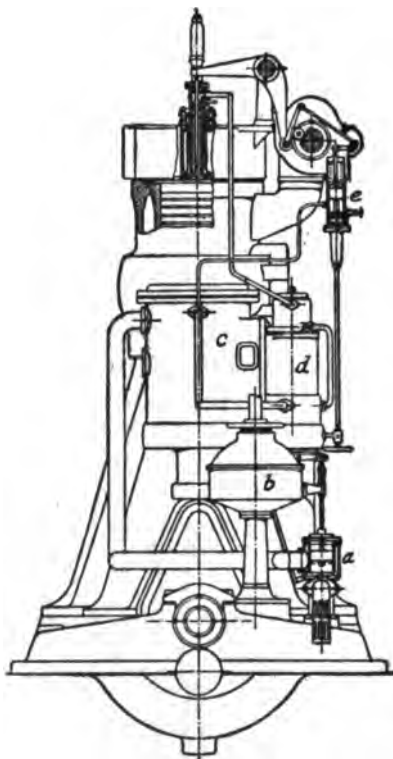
Patented throttling devices for Diesel engines. *a*, throttling valve; *b*, engine governor; *c*, scavenging pump; *d*, compressor; *e*, servo-motor.
